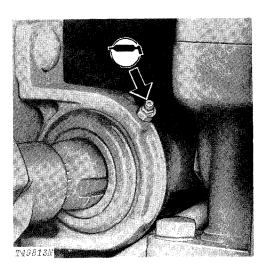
Delimber Transmission Drive Shaft Support Bearing (1 Point)
